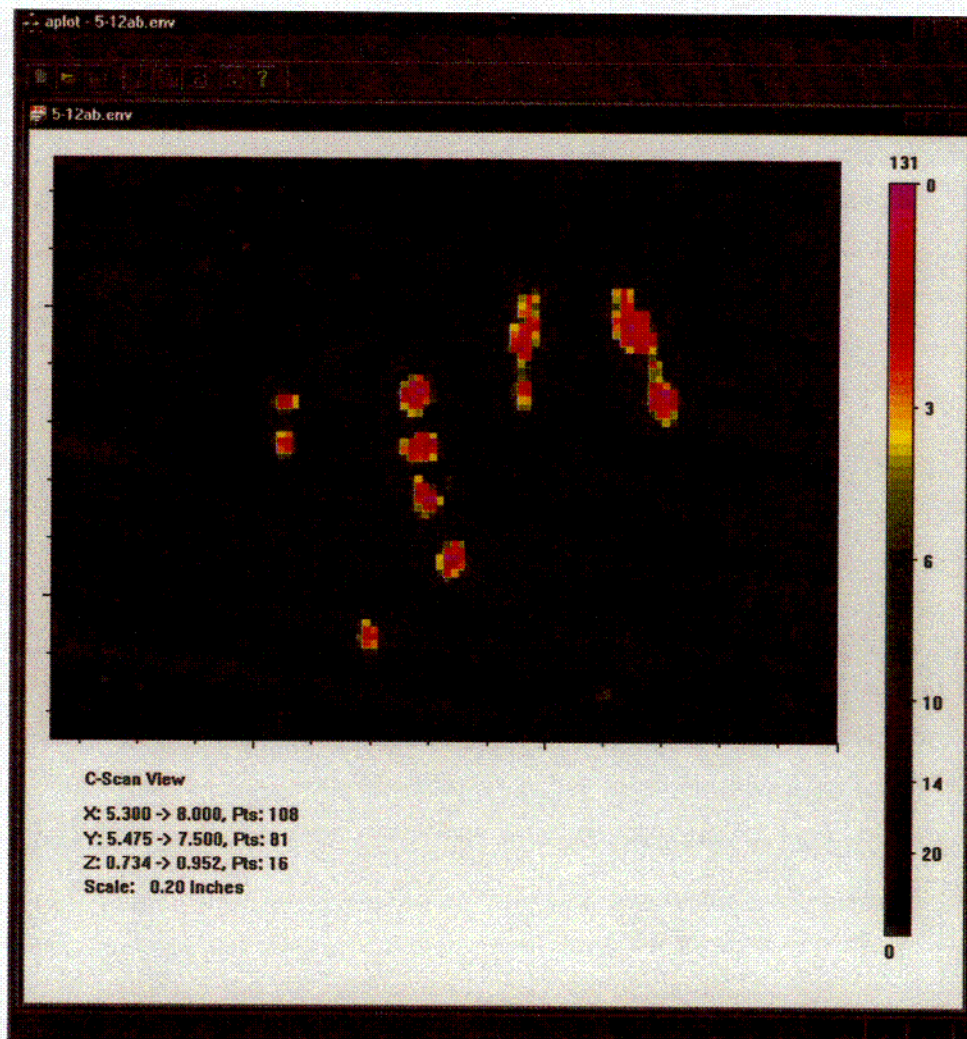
SAFT-UT Inspection of a Large Cluster of Weld Flaws in the Mid-Wall Portion of the Vessel Beltline Weld. The through-wall direction, vessel "Z", is on the abscissa and labeled as X: 5.475 -> 8.000 inches in the image. The distance along the beltline weld, vessel "Y", is on the ordinate and labeled as Y: 5.475 -> 7.500 inches.
